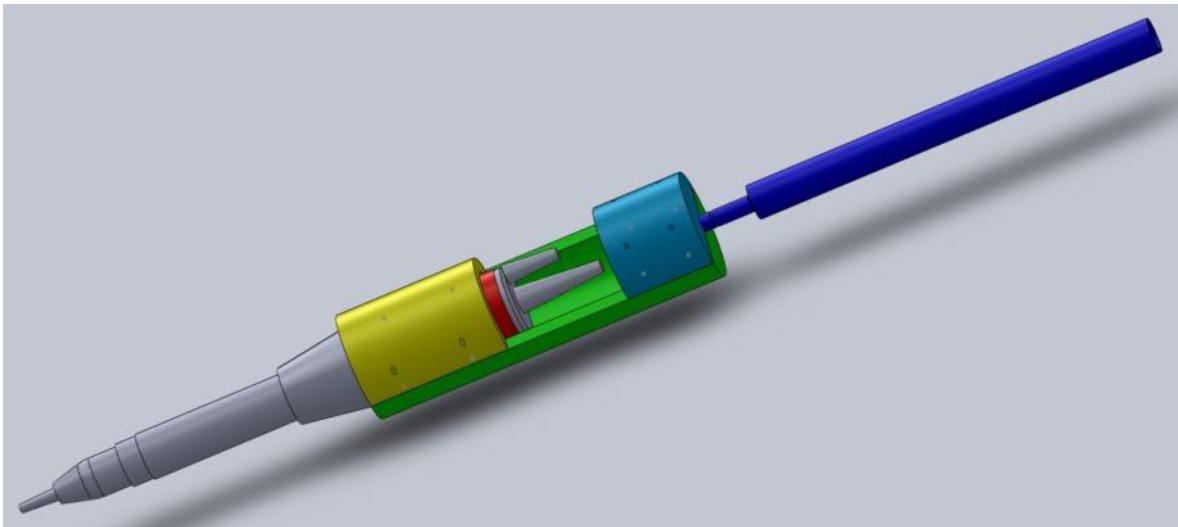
Mechanical clamp used to attach the surgical drill below the handle [25]
